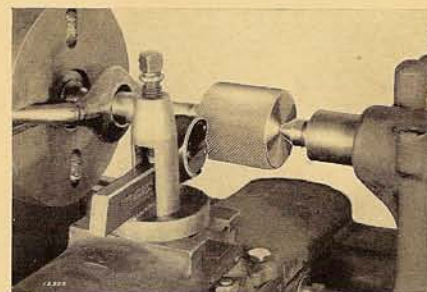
Knurling Large Handle Mounted Between Centers in the Lathe.
